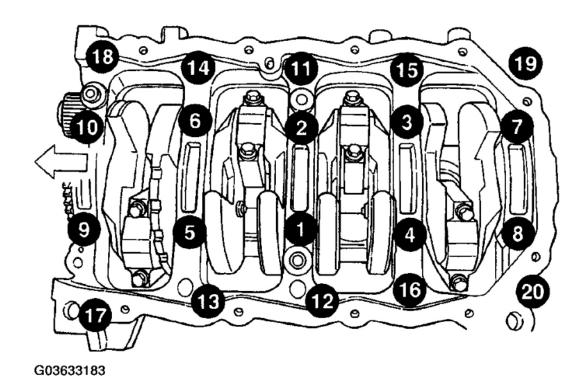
Identifying Bedplate Bolt Torque Sequence Courtesy of DAIMLERCHRYSLER CORP.
